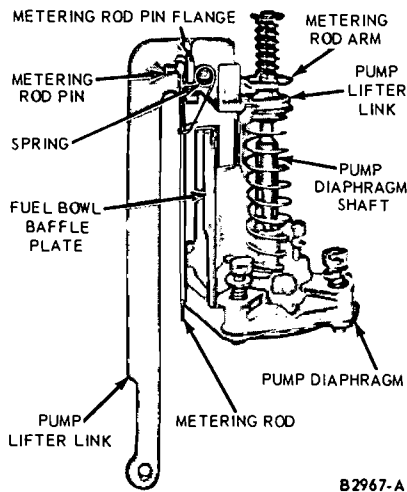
Accelerating Pump and Lifter Link Assembly—Carter Model YF 1-V
